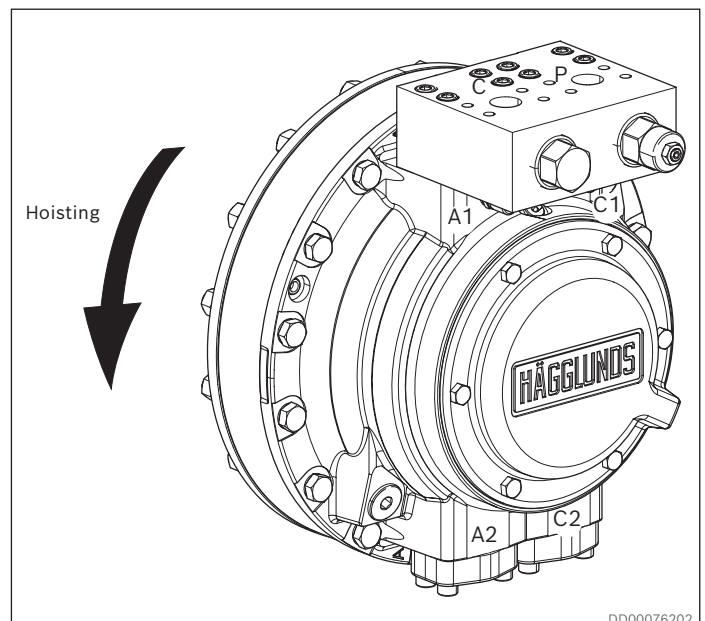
Example CA configuration C: High pressure in P valve / C1 motor (Hoisting), motor shaft rotating clockwise viewed from the motor shaft side. Lowering in C valve / A1 motor port
